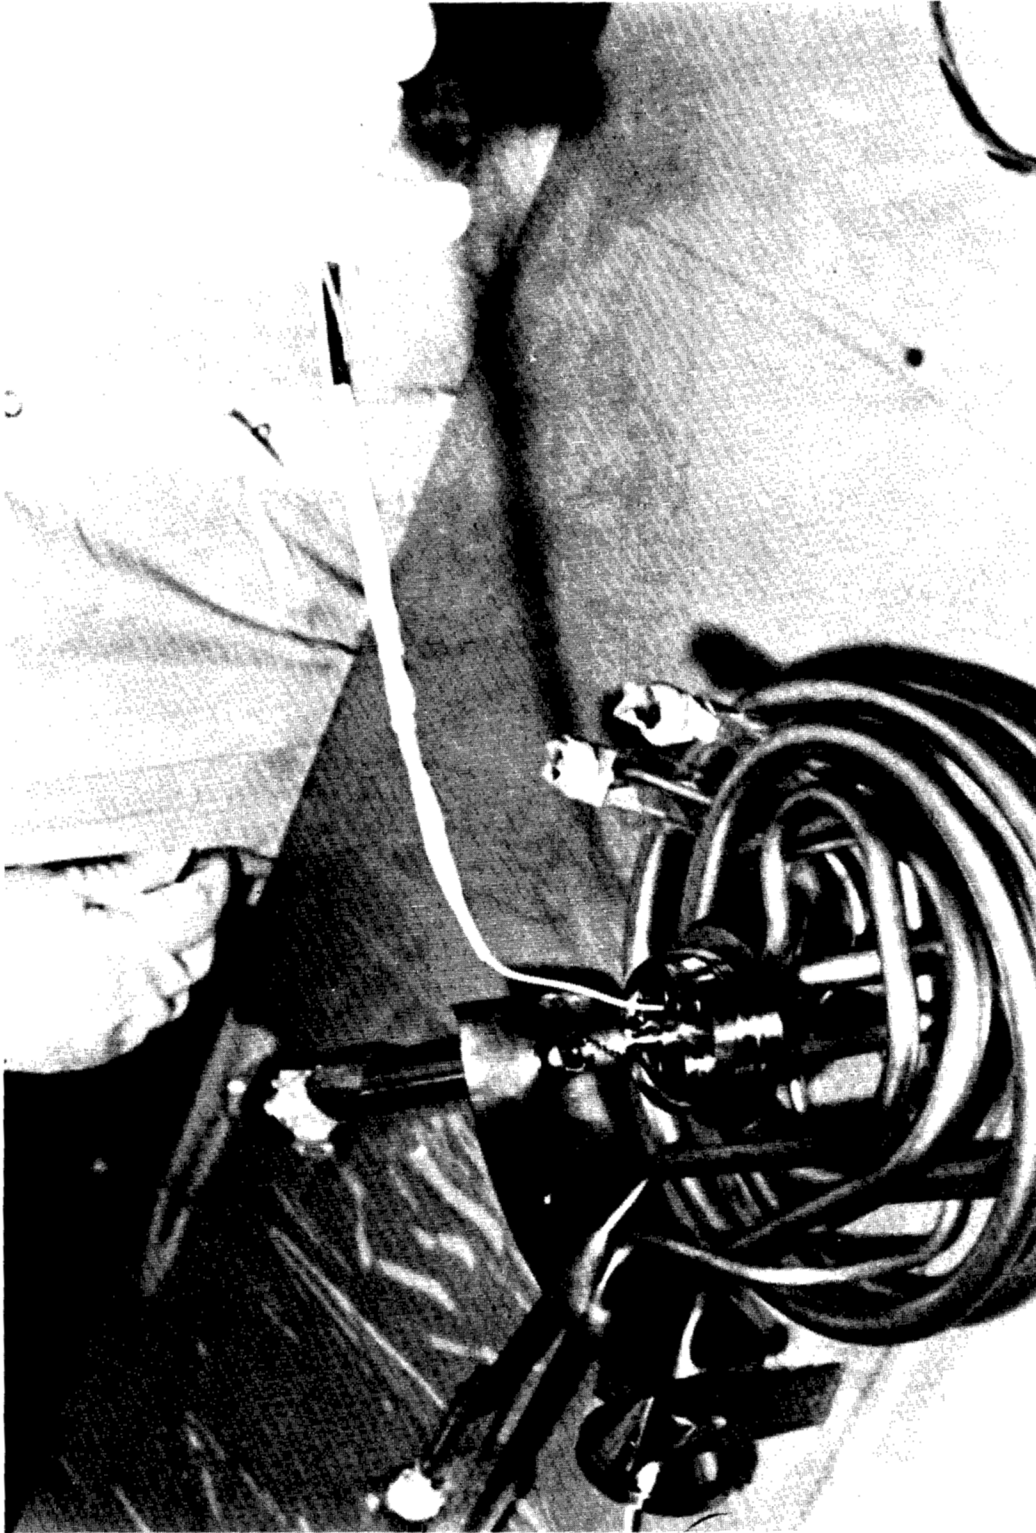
Pulling quantity probe wires into upper coil assembly.
